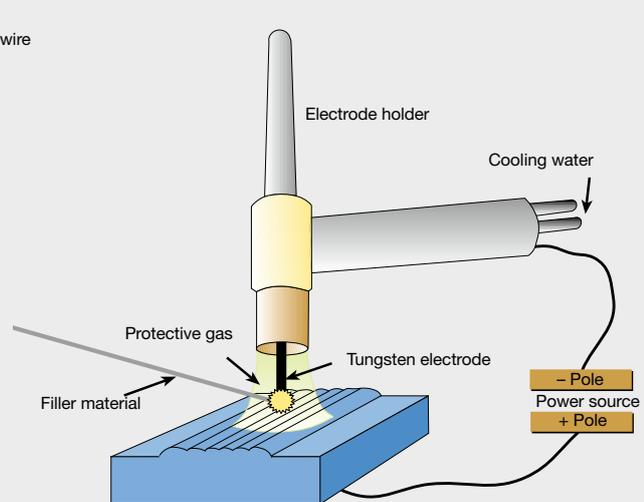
Gas Tungsten Arc Welding GTAW (TIG)
